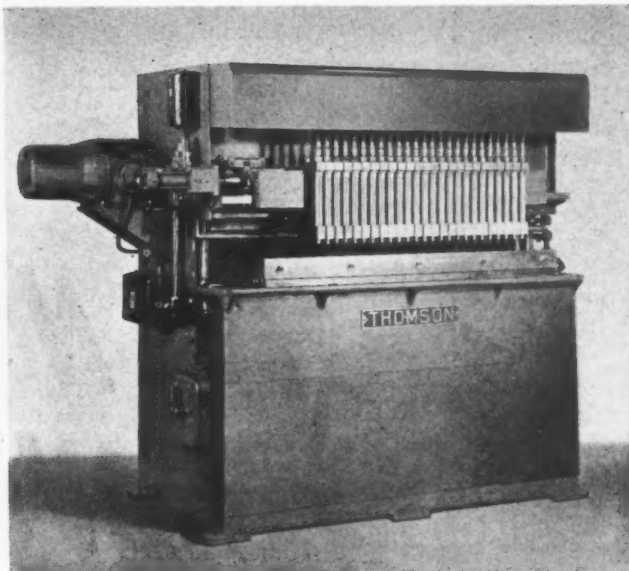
Thomson "Ultra Speed" Spot-welder
